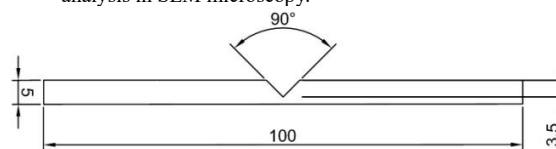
Dimension of the partially grooved 6061 alloy plates for GTAW (mm).
